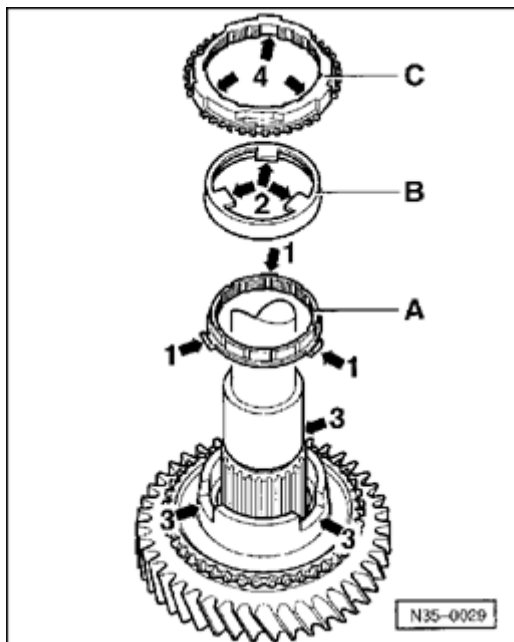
Installation position of outer ring, inner ring and 2nd gear synchro ring
